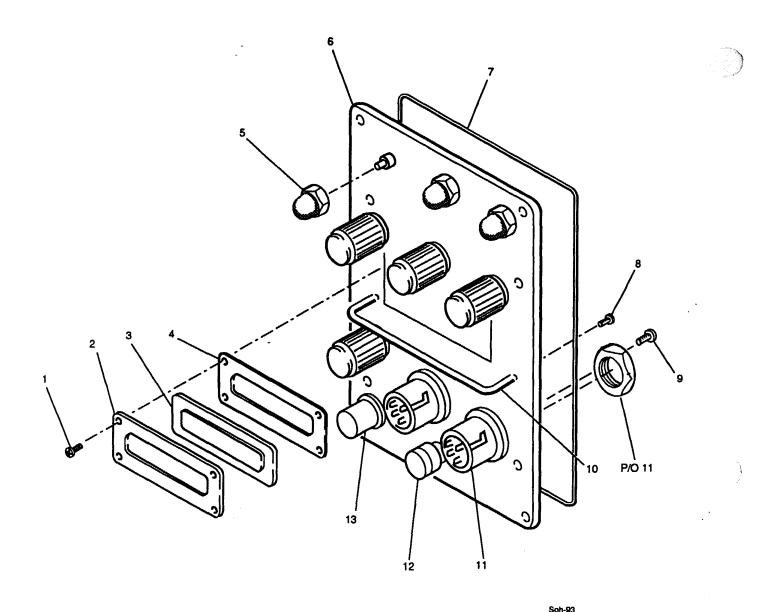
Disassembly of Control Panel Assembly (Sheet 1 of 2)
